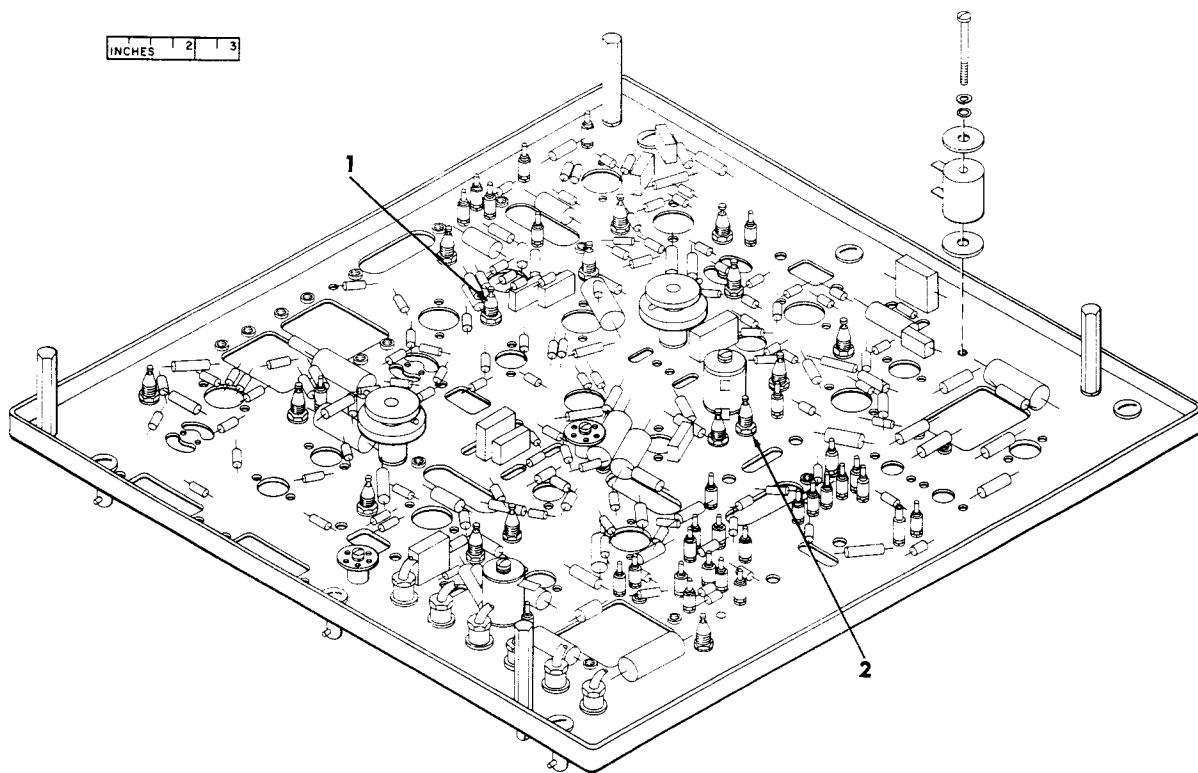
Coder, radar, guided missile (8159347) - partial exploded view
